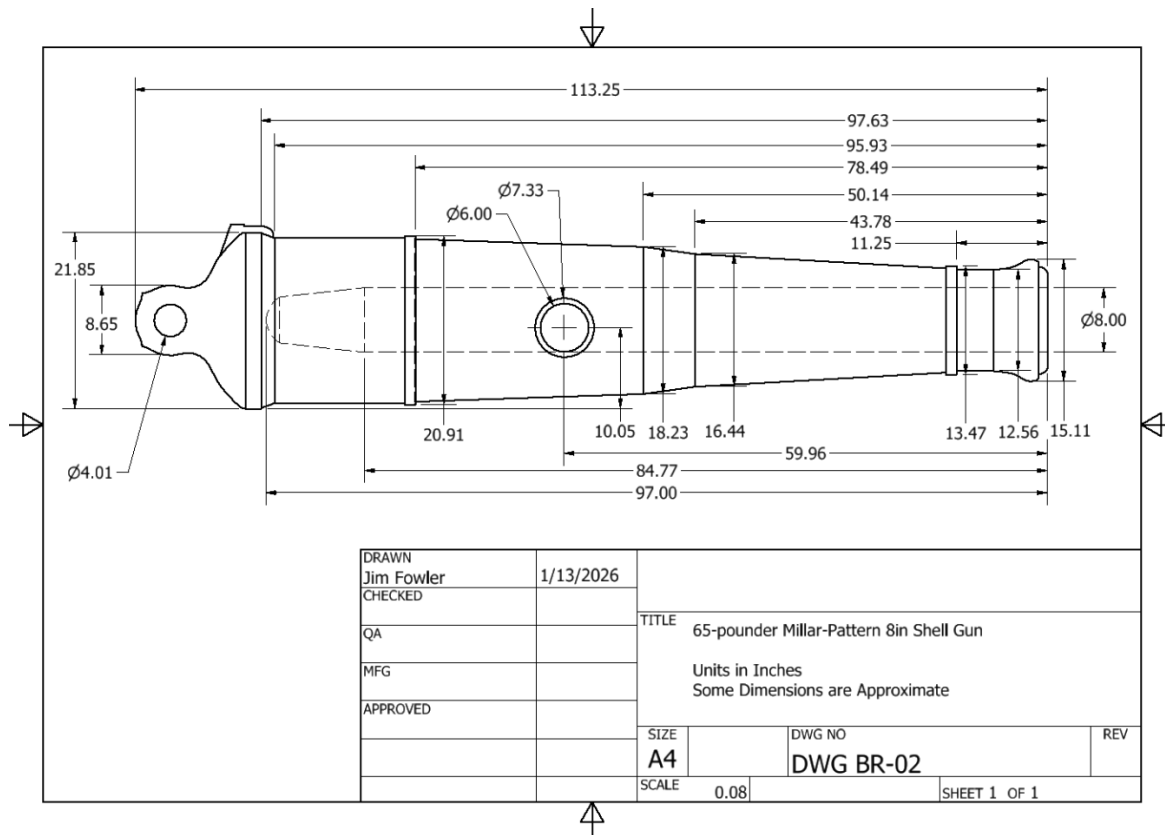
A dimensioned engineering drawing of the BR-02 CAD model. (Created by James Fowler in Autodesk Inventor.)
